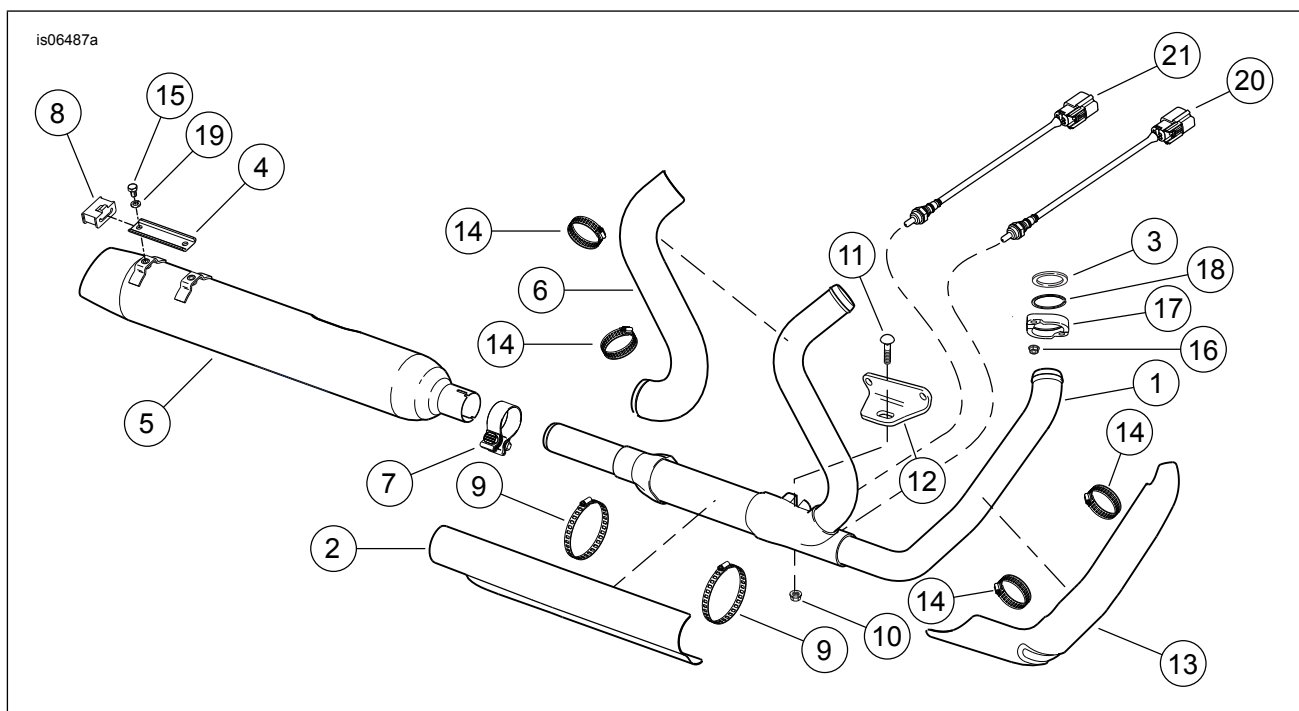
Service Parts: 2-Into-1 Head Pipe Kit
